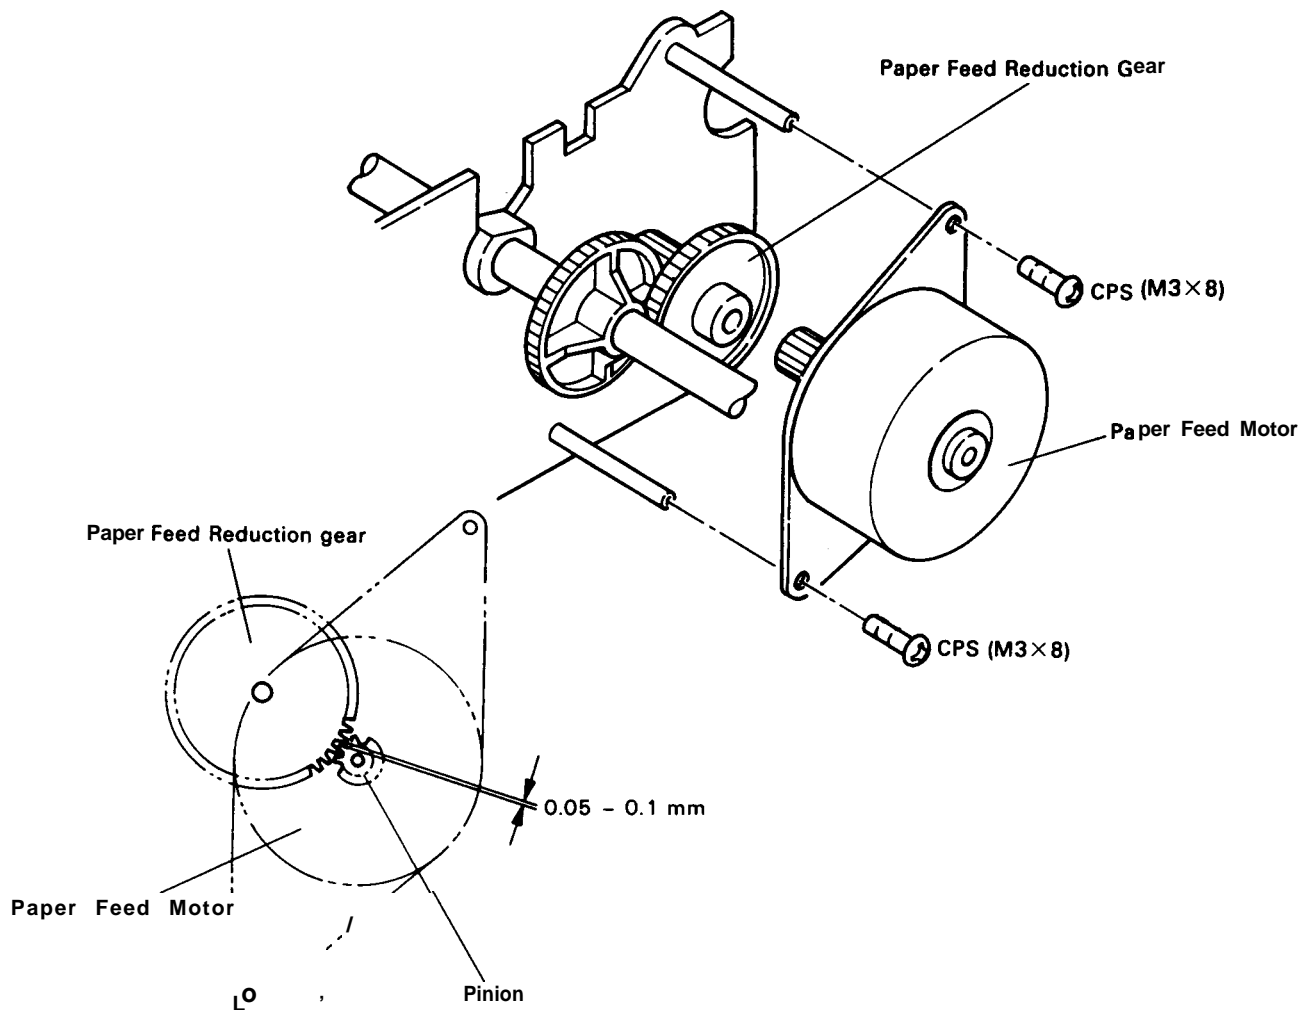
, Paper Feed Motor and Paper Feed Reduction Gear Backlash Adjustment
